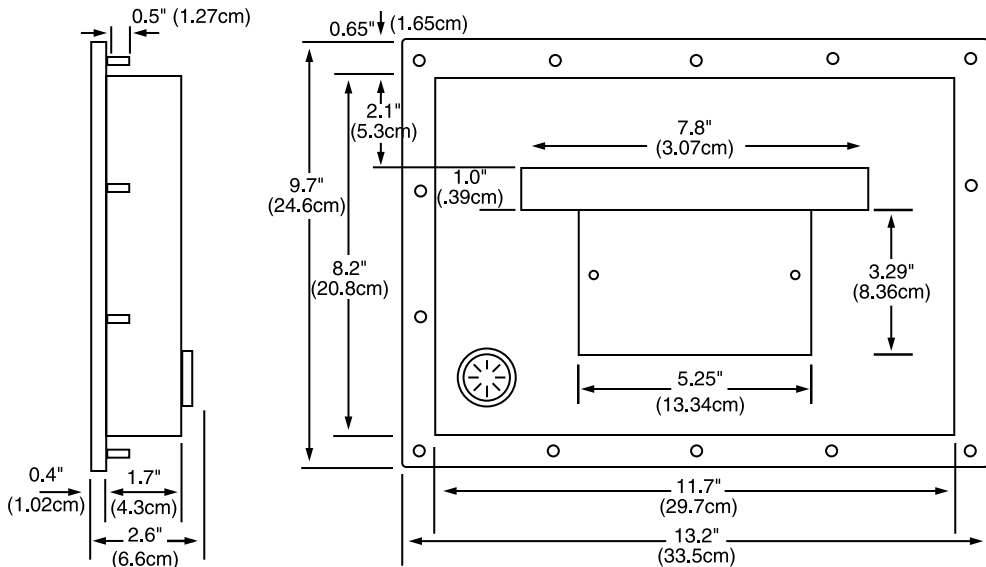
Mechanical Dimensions of the FMT1040, Back and Side Views
